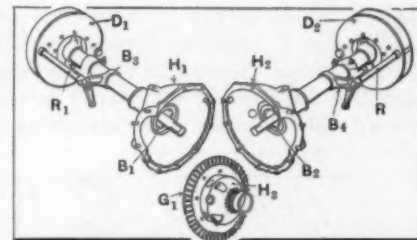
Live rear axle disassembled showing details in the region of the differential
